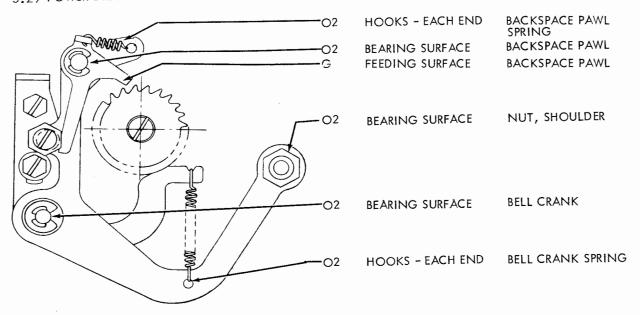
B. TYPING REPERFORATOR TT-373/UG, AND TT-375/UG LUBRICATION - PERFORATOR MECHANISM
